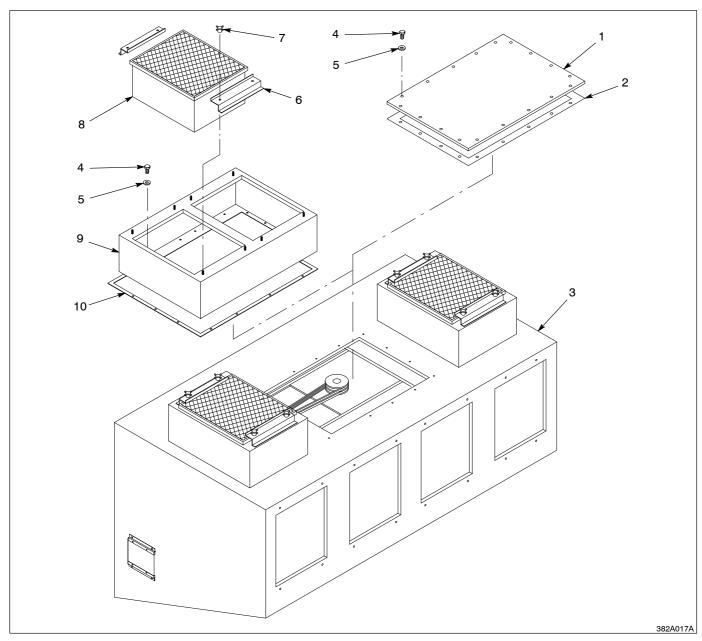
Installing motor cover-mounted final filter kits (512/518 shown)
